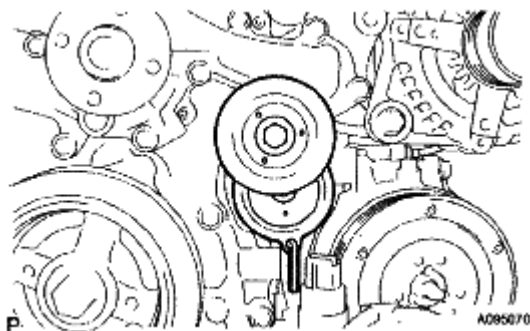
Identifying Bi-Hexagon Wrench Into Holes To Fix V-Ribbed Belt Tensioner
